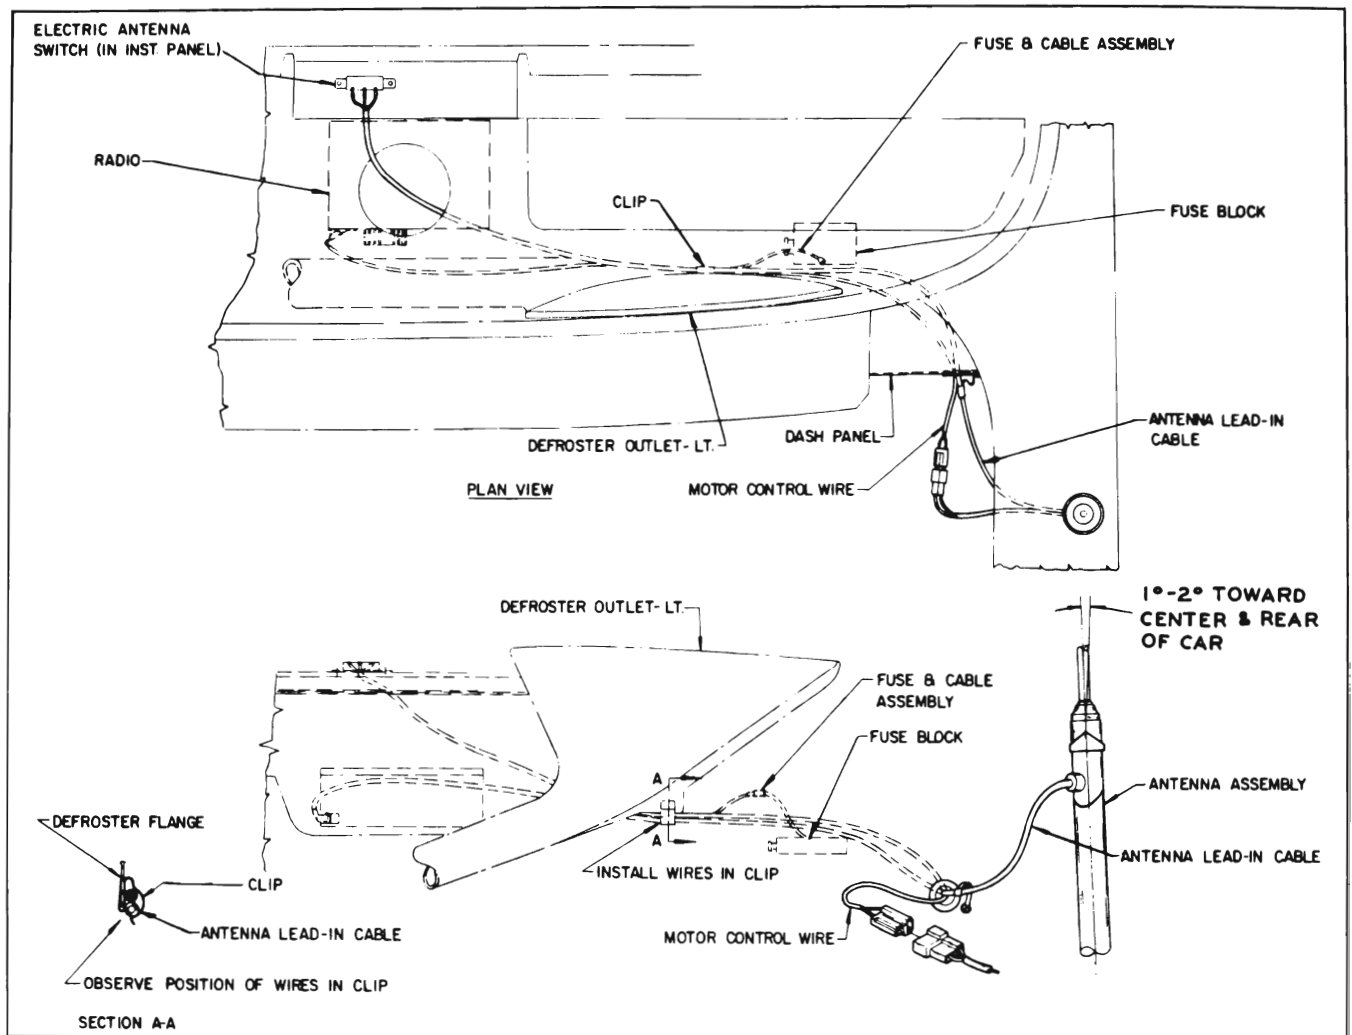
Antenna Lead-In and Motor Control Wire Installation
